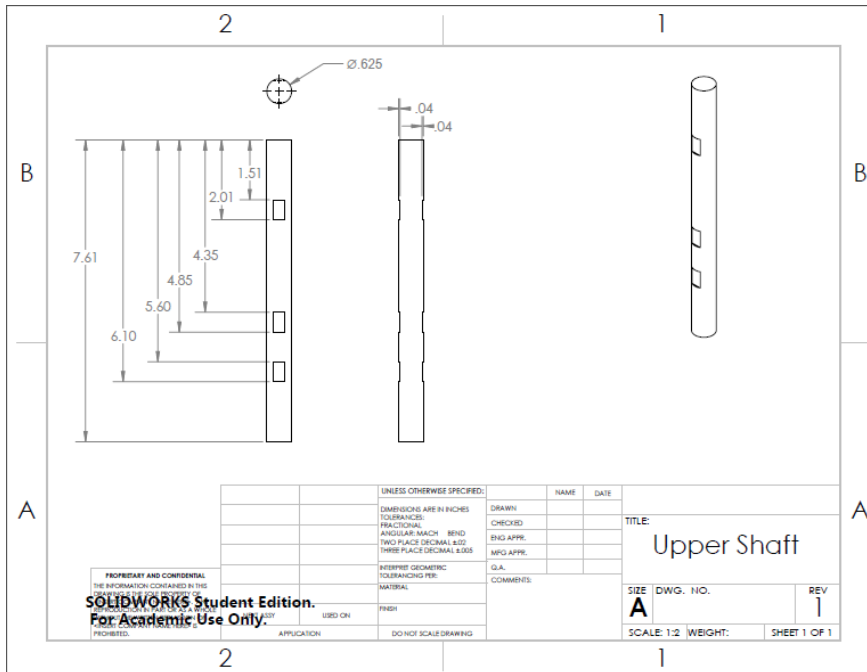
Upper Shaft Drawing. Revised: See Appendix E.3
